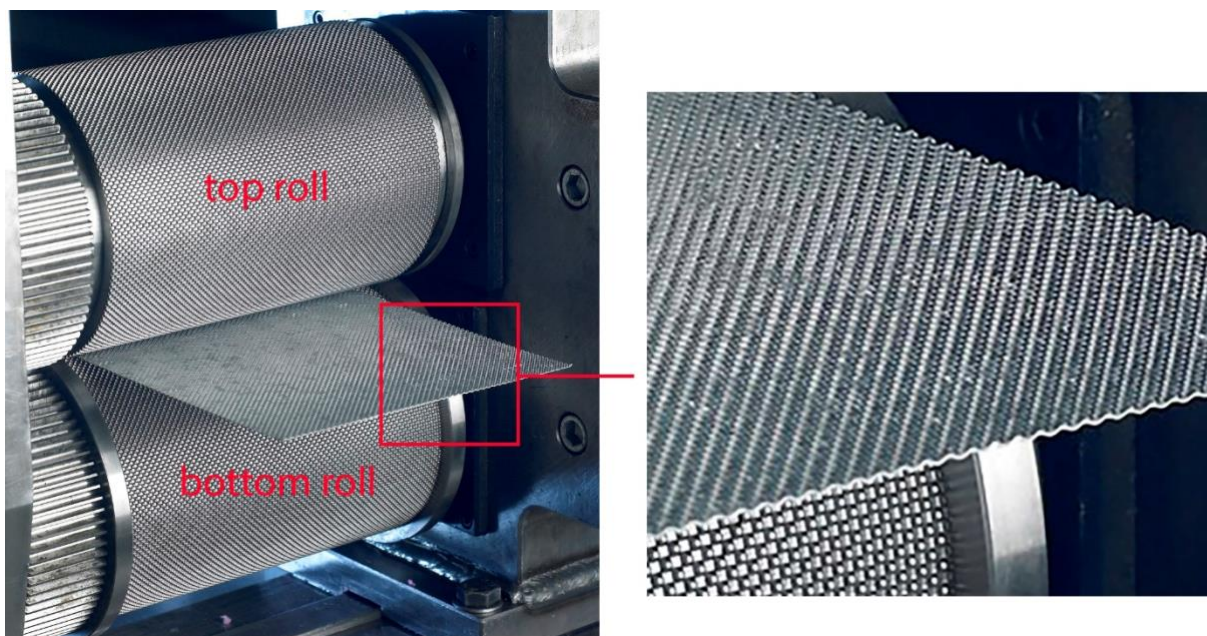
The UltraSTEEL[®] forming rollers and dimpled steel sheet.
